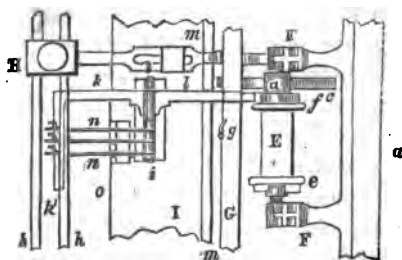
Mechanism of Silk Doubling Mill.—Plan.
